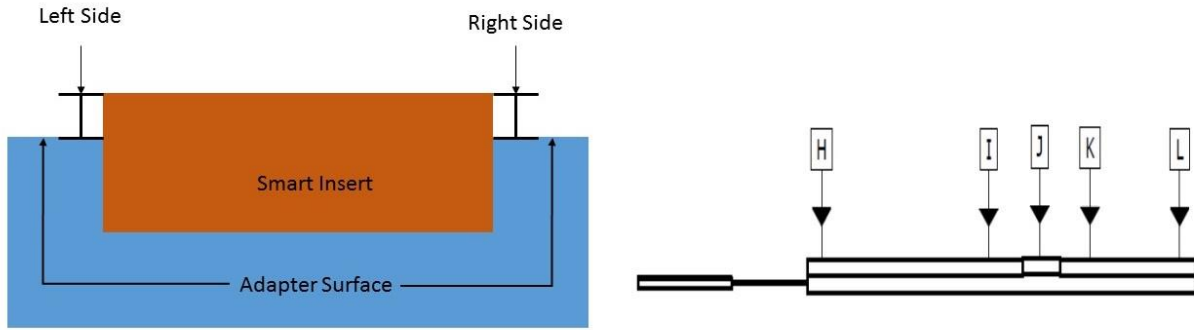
Measurement Location for Insert Height Above Surface of Adapter (Left), Insert Thickness Dimension Location on the Insert (Right)
